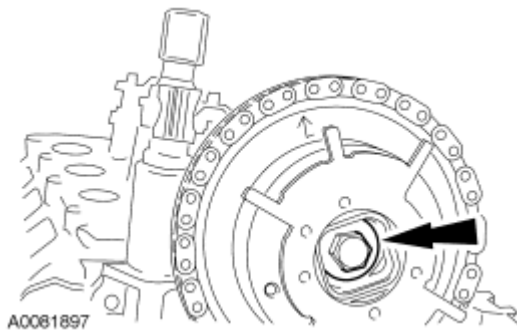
Identifying Camshaft Phaser And Sprocket Assembly Bolt
